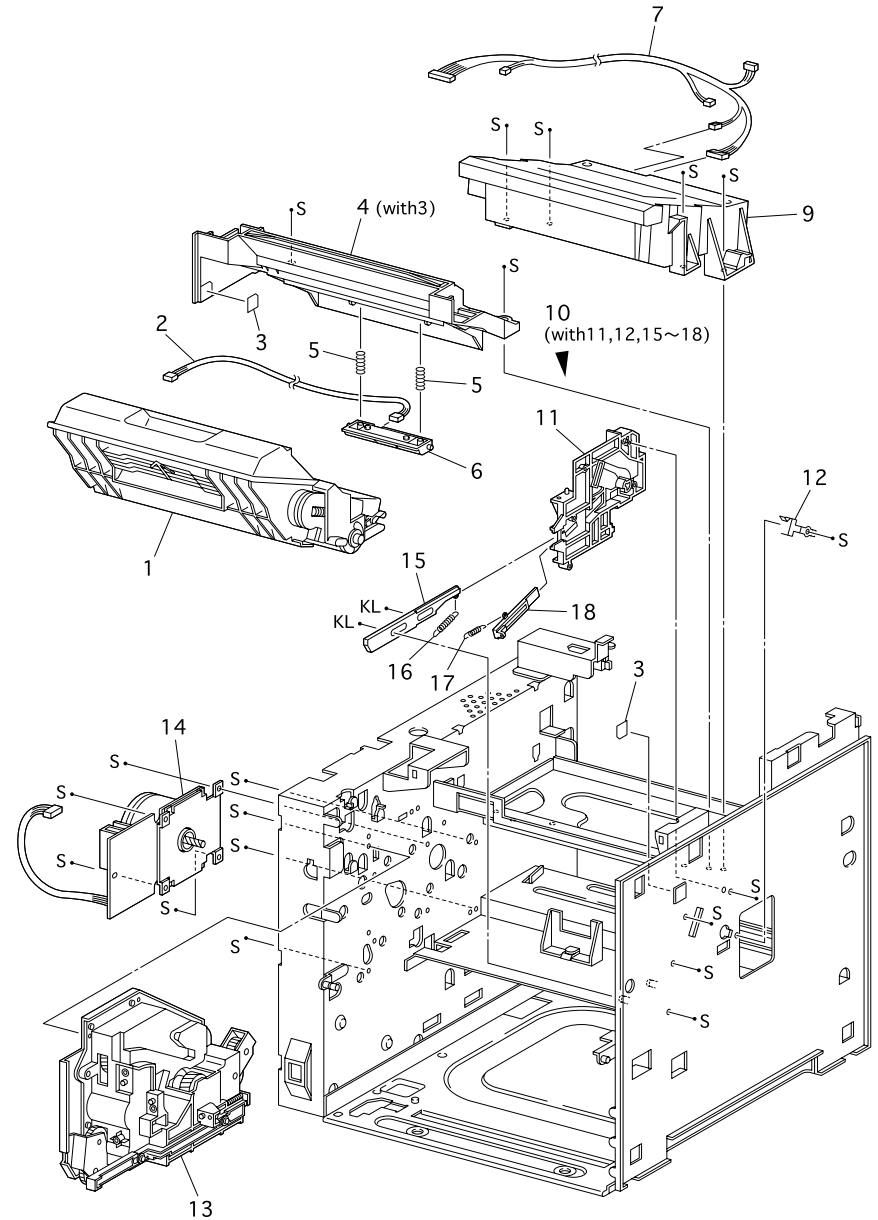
Exploded Diagram for Drive & Electrophotographics
